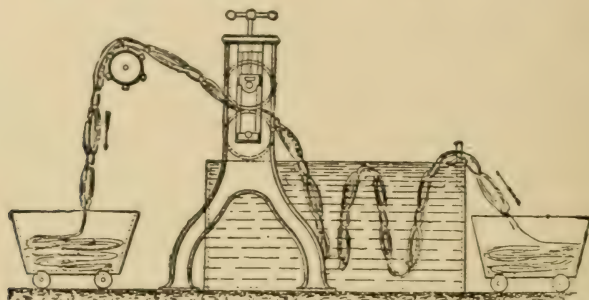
WOOLEN CLOTH OPEN WIDTH SCOURING MACHINE.
